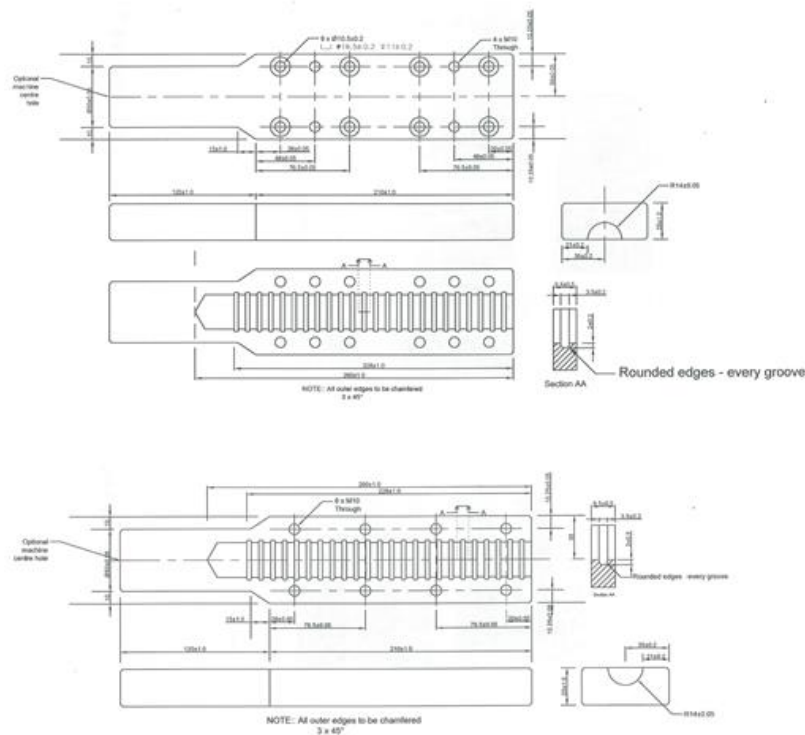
Detail drawing of the Minova axially split SEPT assembly
